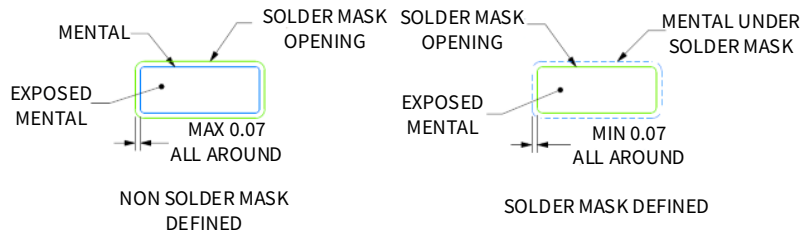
WQFN14 package board layout example for NCAB0104-Q1QDDR
